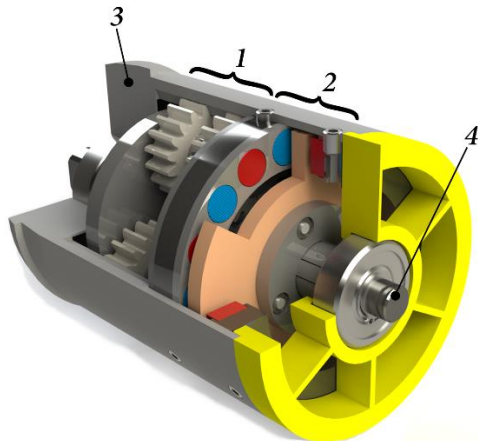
General view of MBR (3D model in SolidWorks): 1 – planetary multiplier; 2 – magnetic (eddy current) brake; 3 – brake insert; 4 – axis. MBR, magnetic brake roller
